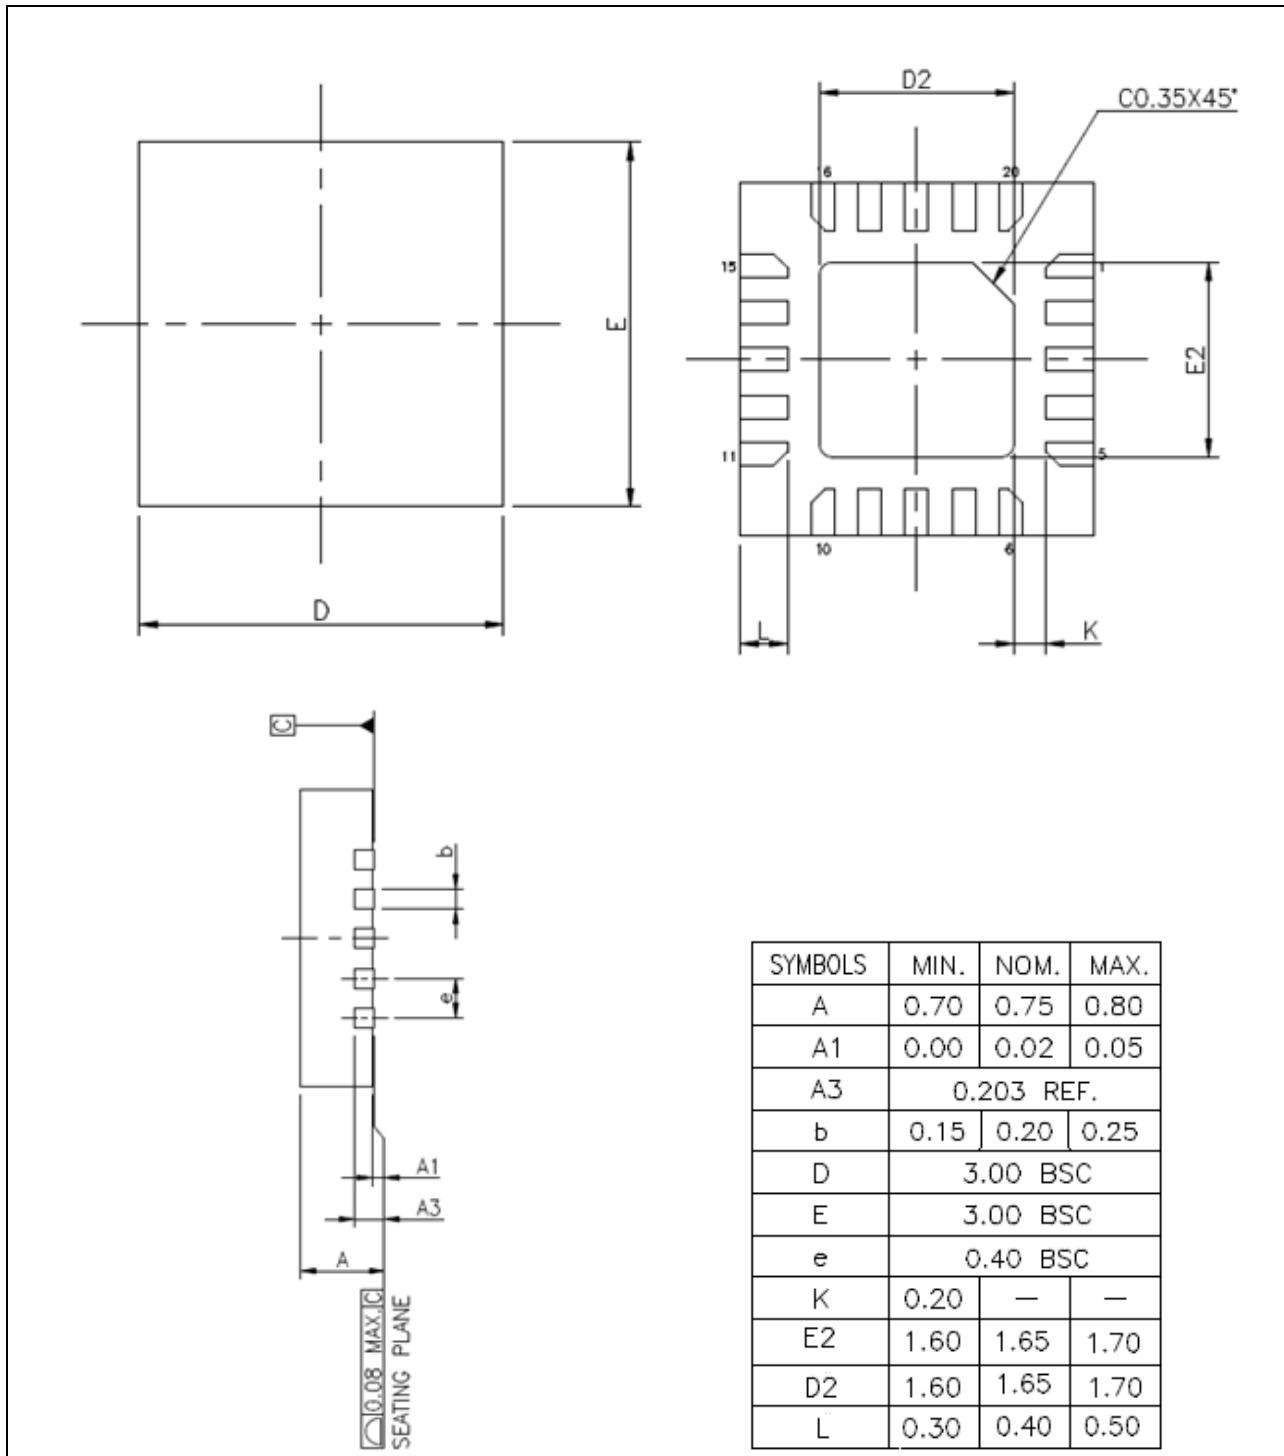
QFN-20 Package Dimension for MS51XB9AE
